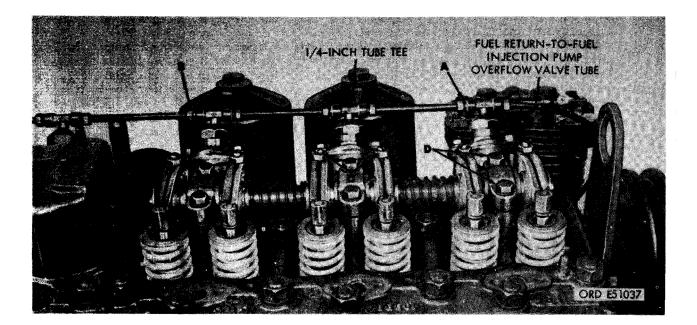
DISCONNECTING OR CONNECTING FUEL RETURN TUBES AND/OR REMOVING OR INSTALLING FRONT SET OF ROCKER ARMS.
